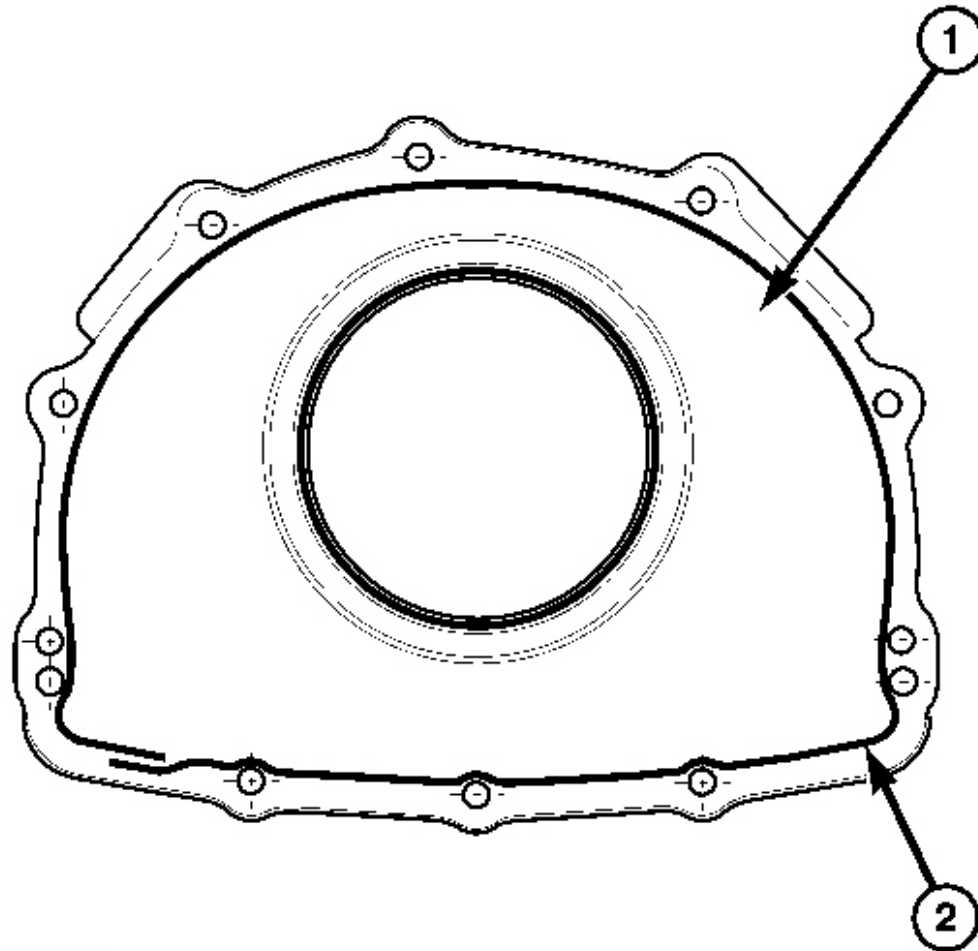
Rear Main Seal, Rear Main Seal Carrier & Crankshaft
